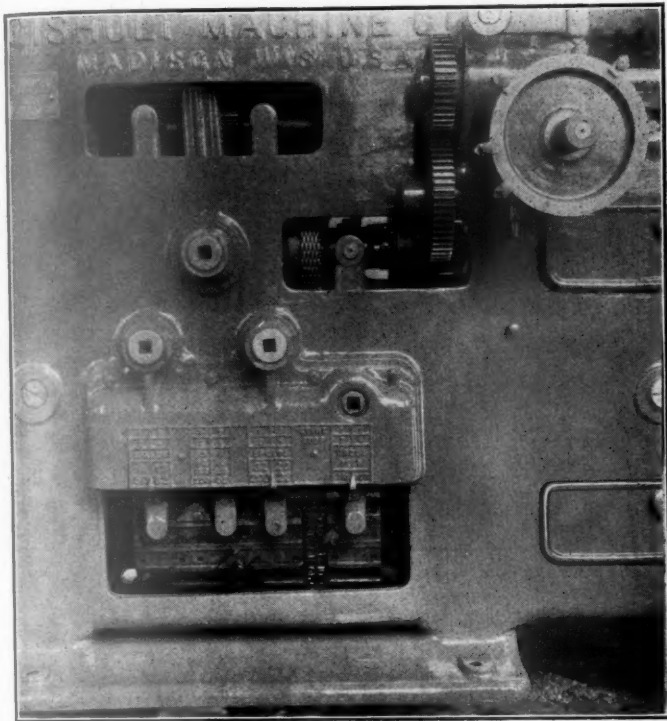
Drum Blocks Which Control the Spindle Speeds
